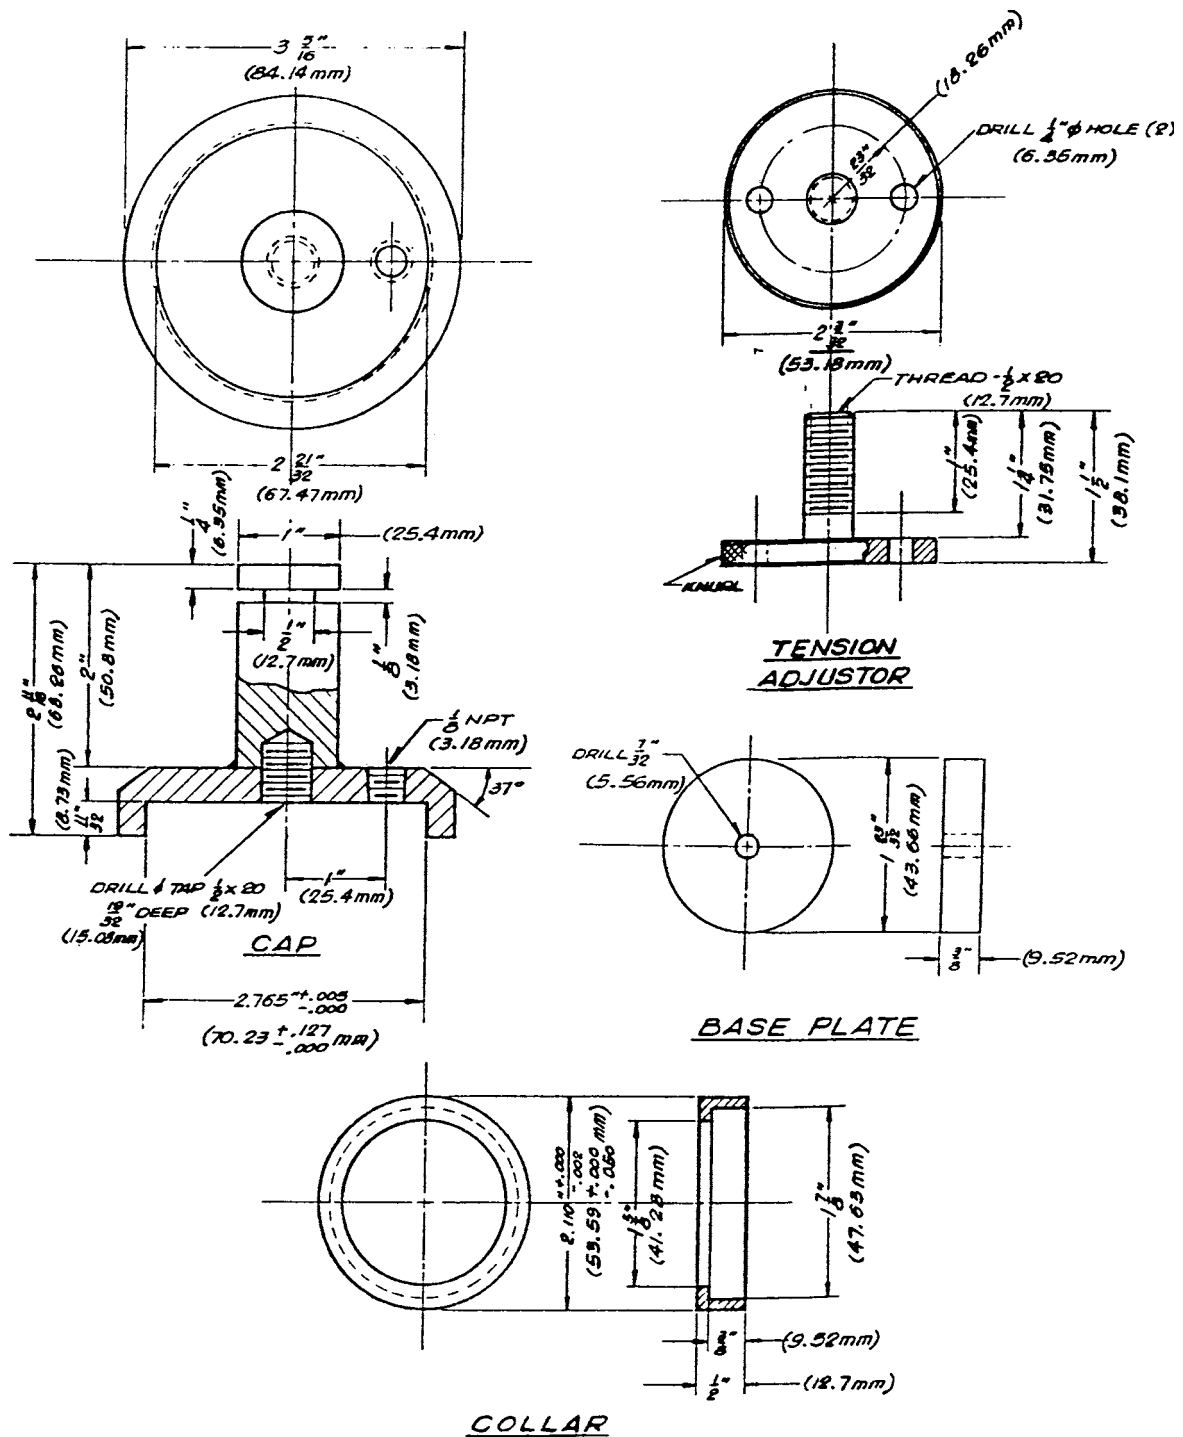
Pressure Filter Tension Adjuster, Collar, and Cap
